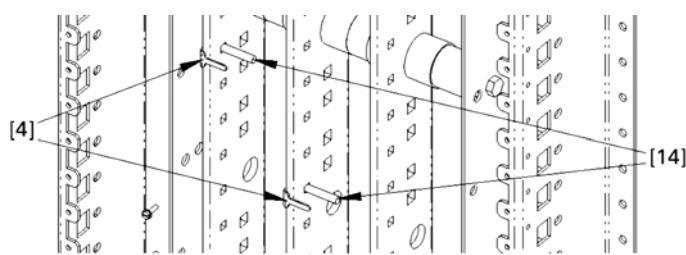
Installing carriage bolt assemblies on phases A and B, isometric view.
